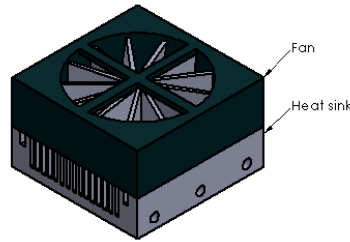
Forced air cooled heat sink with top mounted axil fan.
